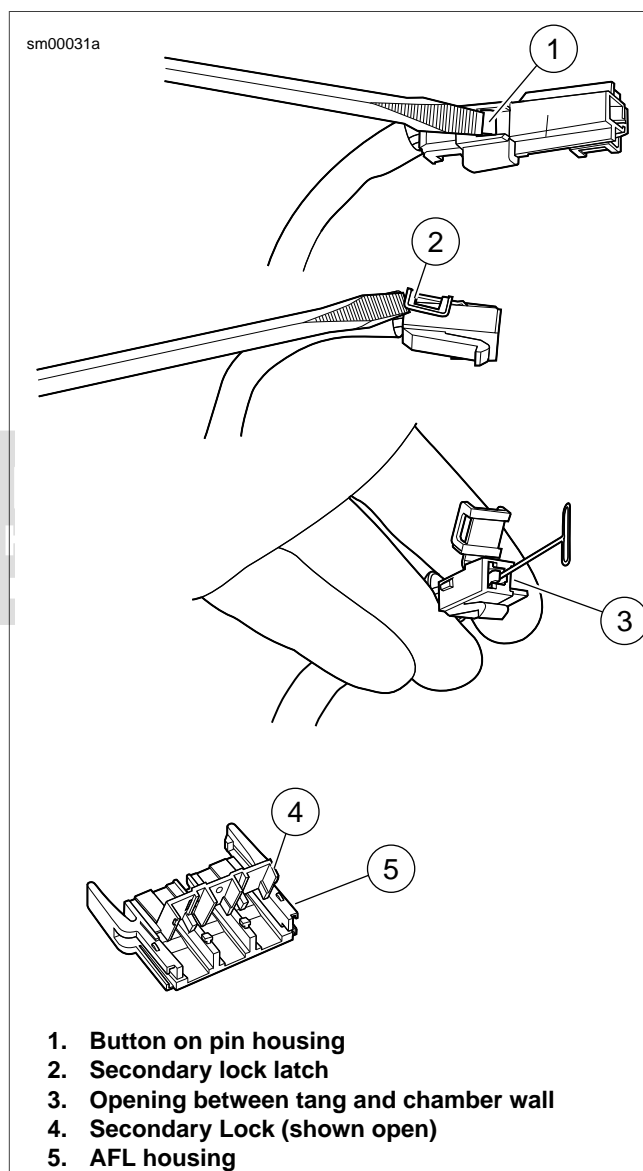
480 Metri-Pack Connector: Remove Socket Terminal
